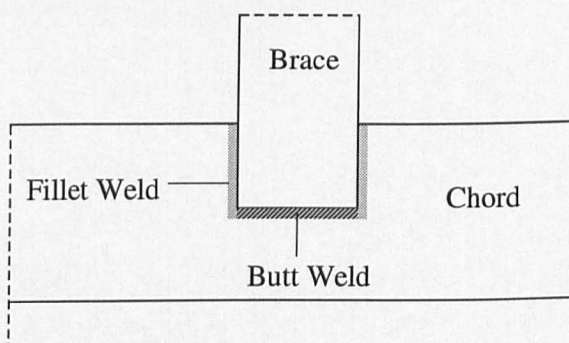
Recommended positioning of fillet and butt weld on the square bird beak joint
